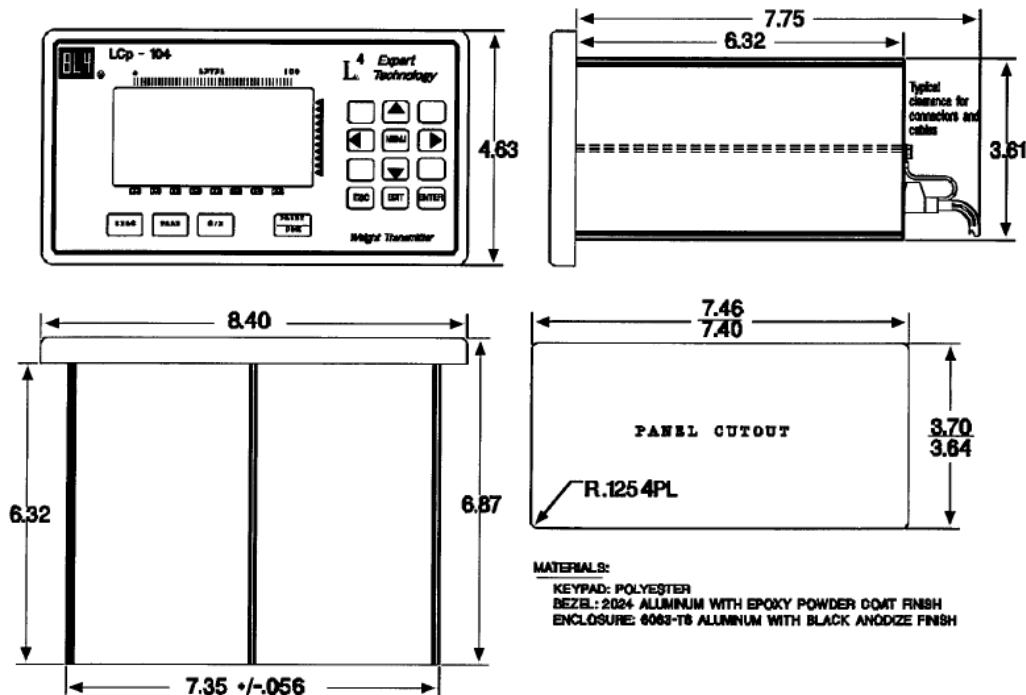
LCp-104 Display Console Outline Dimensions.
